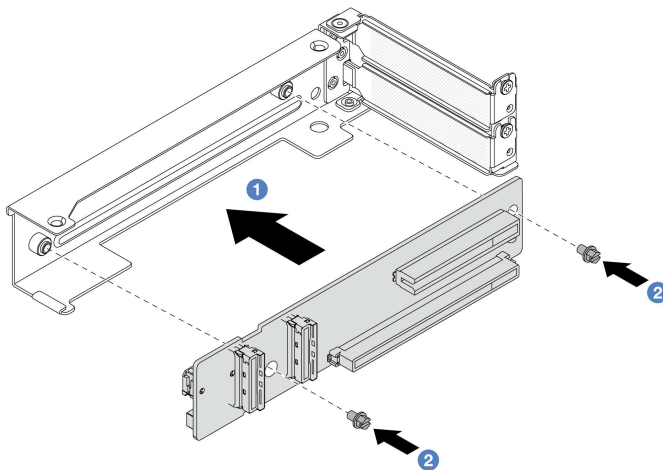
Installing the riser card to 4LP riser 3/4 cage
